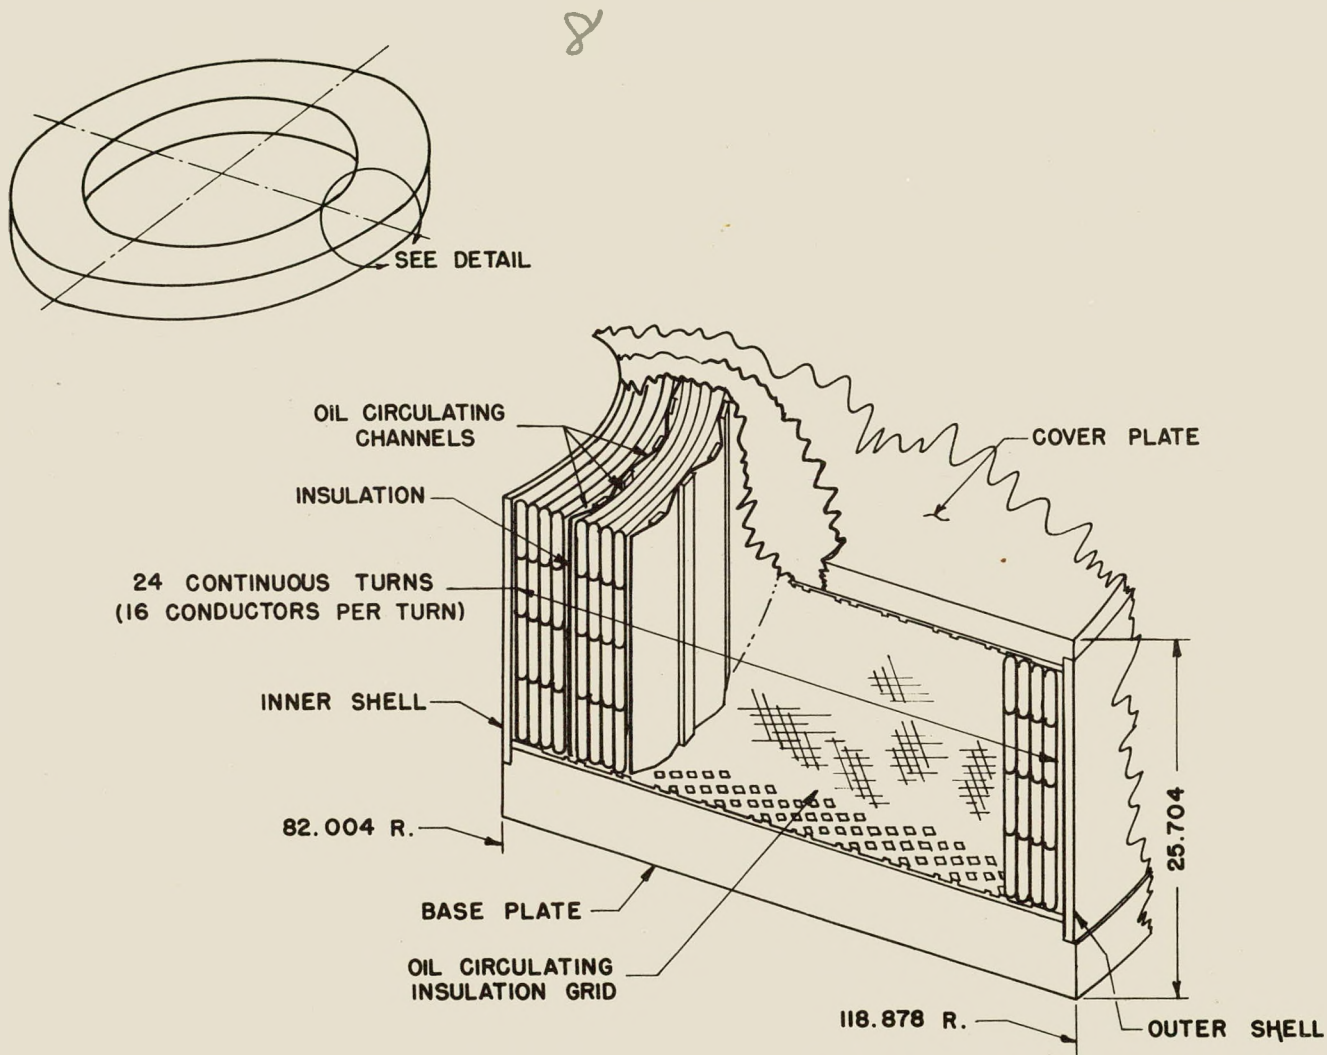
Schematic view of the coil. The sixteen copper bars and the insulation making up each turn are shown as in the formica insulating grid which serves to distribute the cooling oil.
